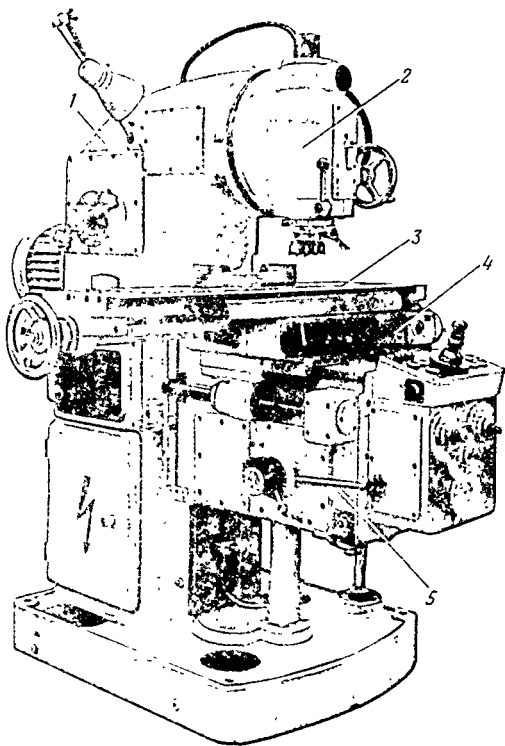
Swivel head vertical knee type milling machine model 6M11B
